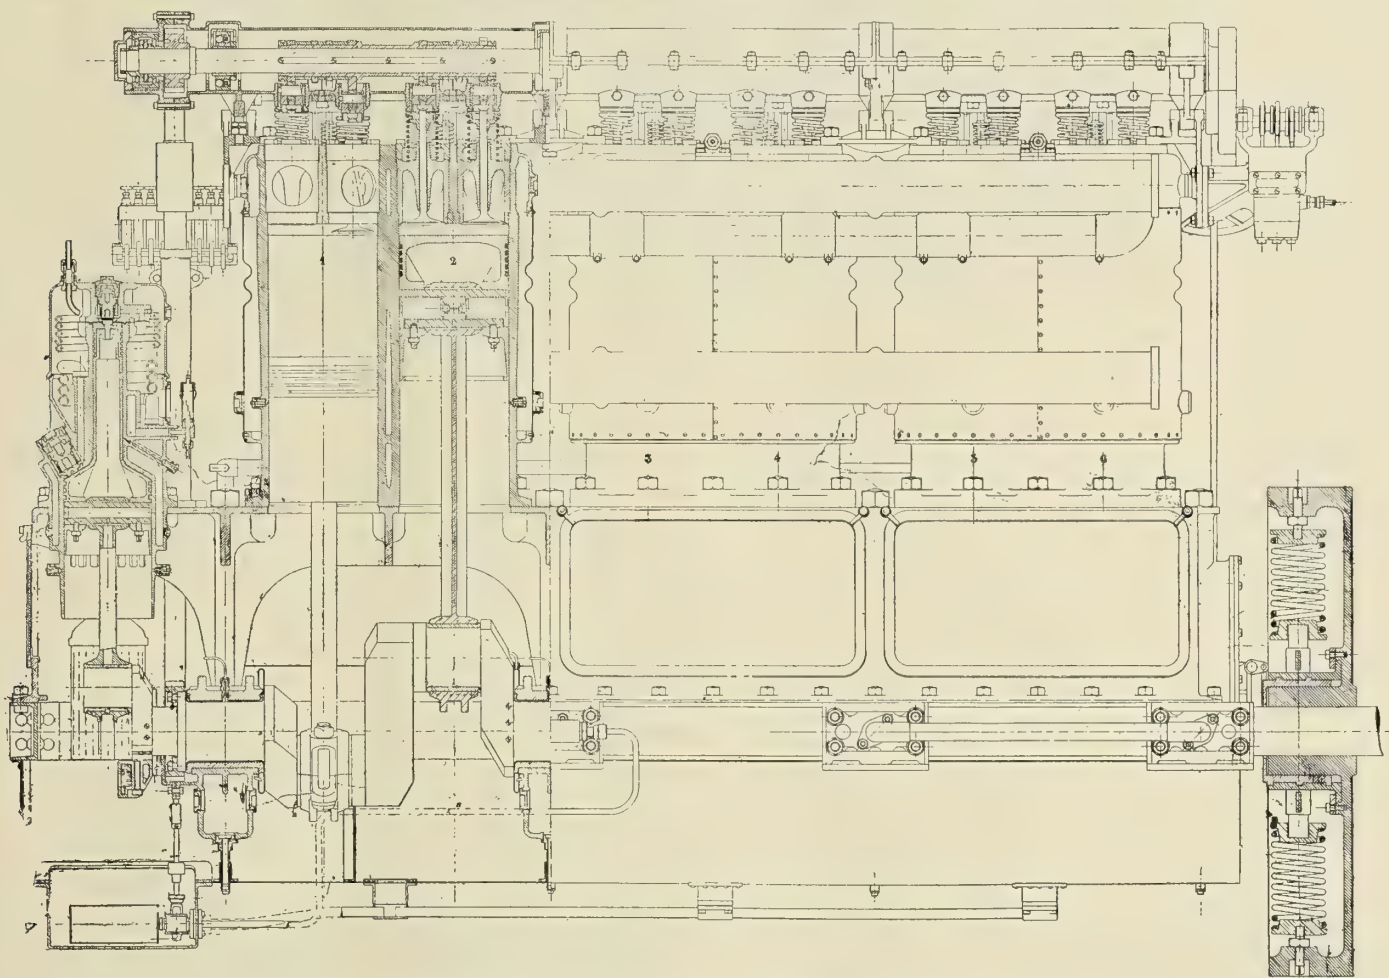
SECTIONAL DRAWING OF SIX-CYLINDER 180-HORSEPOWER NOBEL-DIESEL ENGINE
